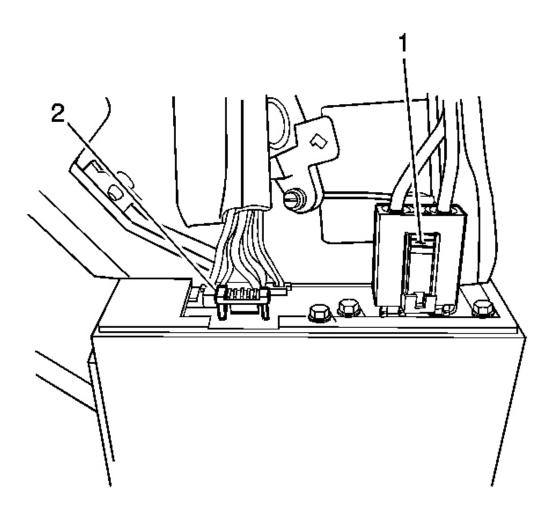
View Of Electrical Connector Release Lever & CPA Courtesy of GENERAL MOTORS CORP.
